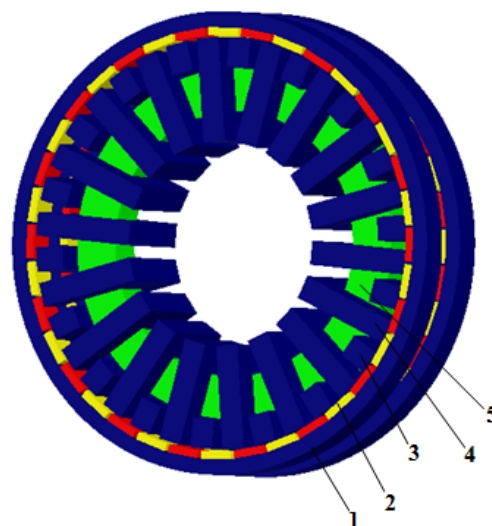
3D view of a single-sided outer-rotor TFPMG. (1) Rotor core. (2) PM. (3) Stator I-shaped core. (4) Stator U-shaped core. (5) Armature winding.
